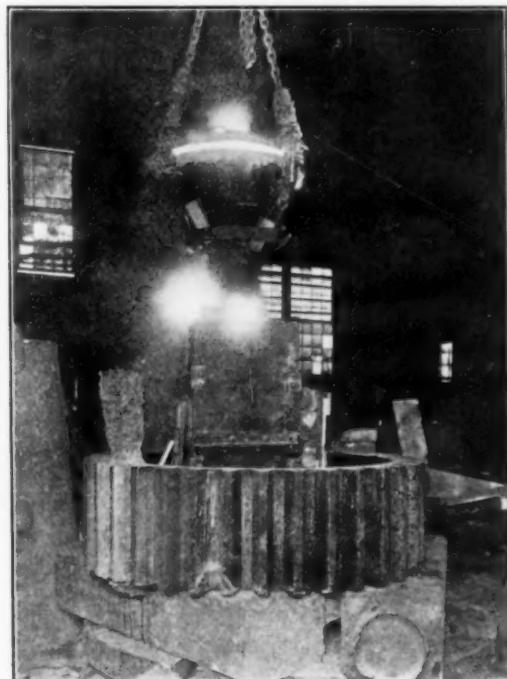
GEAR WHEEL WELDED IN TWO PLACES. VIEW SHOWS ONE COMPLETED WELD AND THERMIT STEEL FLOWING IN THE MOLD FOR SECOND WELD
